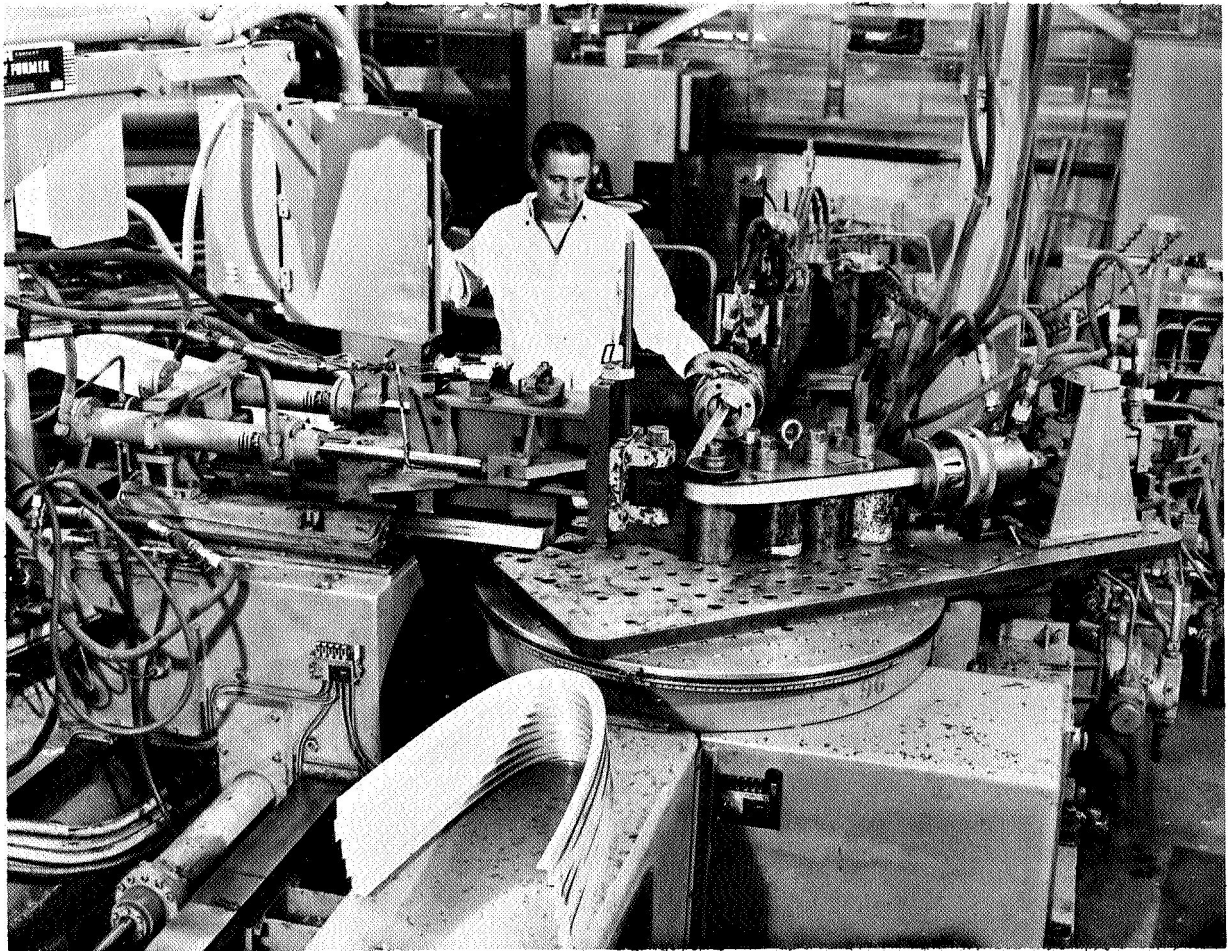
STRETCH-FORMING MACHINE FOR EXTRUDED OR FORMED SECTIONS
